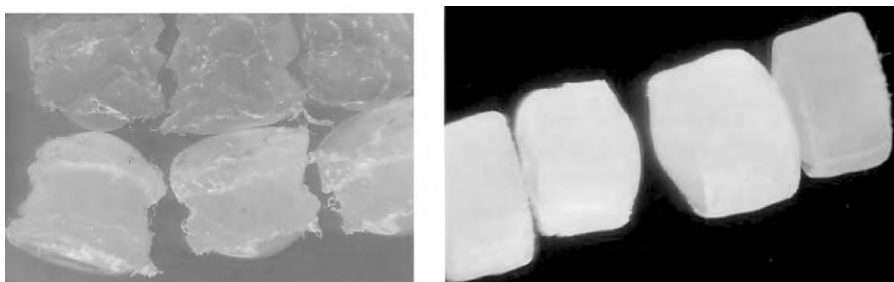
Melt-fractured pellets extruded at 8 kg/h per die hole (3.2 mm in diameter) from a conventional underwater pelletizing die (left) and smooth pellets extruded under the same conditions at 24 kg/h per die hole from the same underwater pelletizing die when locally heated to high temperature (right) (57).
